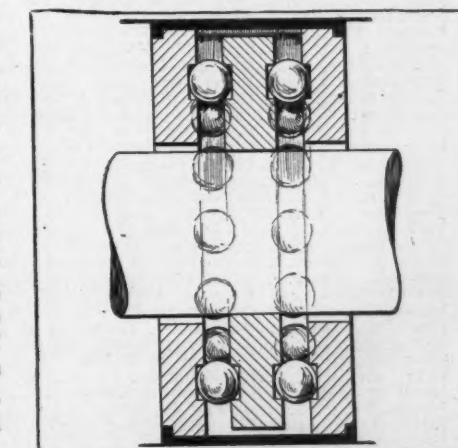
SECTION OF SUSPENSION BALL BEARING
